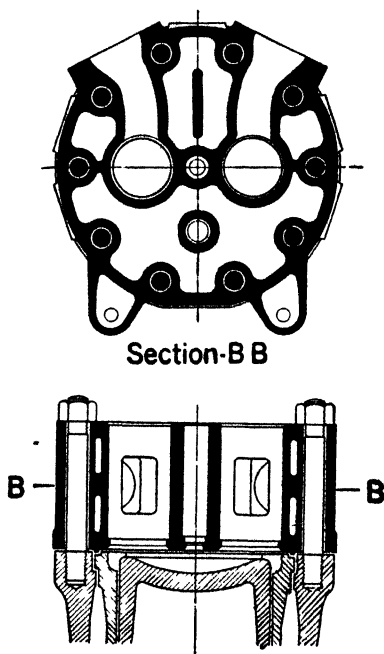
Type of 4-Cycle Diesel Engine Cylinder Head
